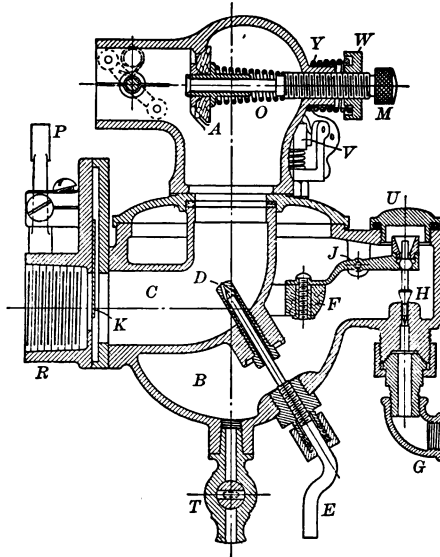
SCHEBLER CARBURETOR, MODEL "D"
